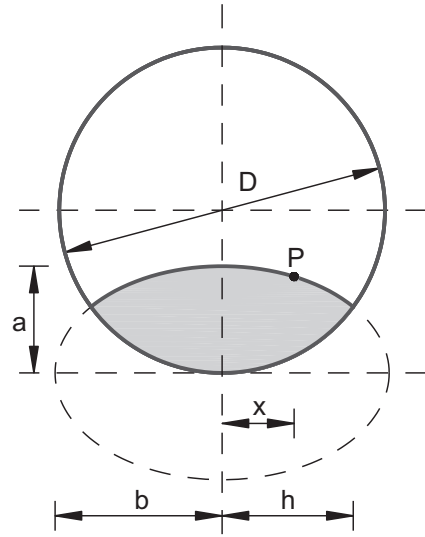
Elliptical crack model used by Shin and Cai [13].
